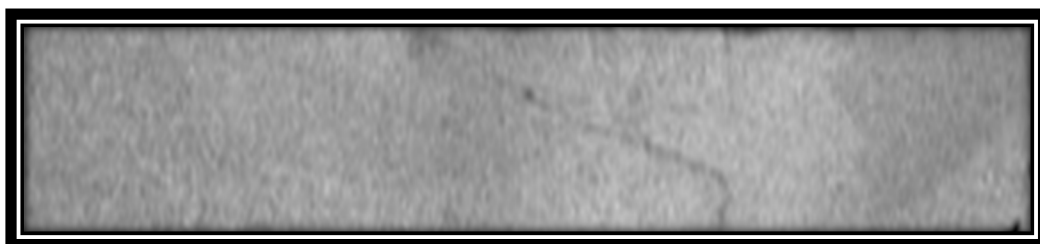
Macrostructure weld joint of Specimen (B) friction stir weld joint at (40x).
